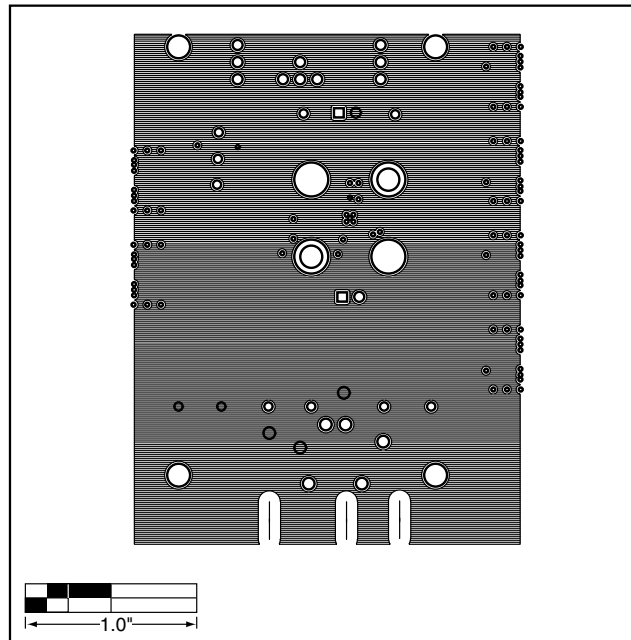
MAX3964ETP EV Kit PC Board Layout—Power Plane
